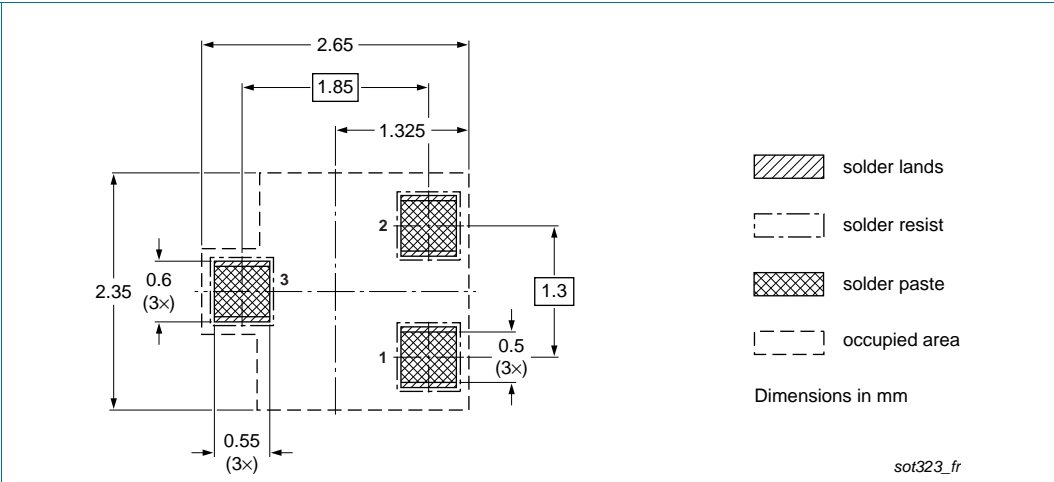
Reflow soldering footprint PDTC143XU (SOT323/SC-70)
